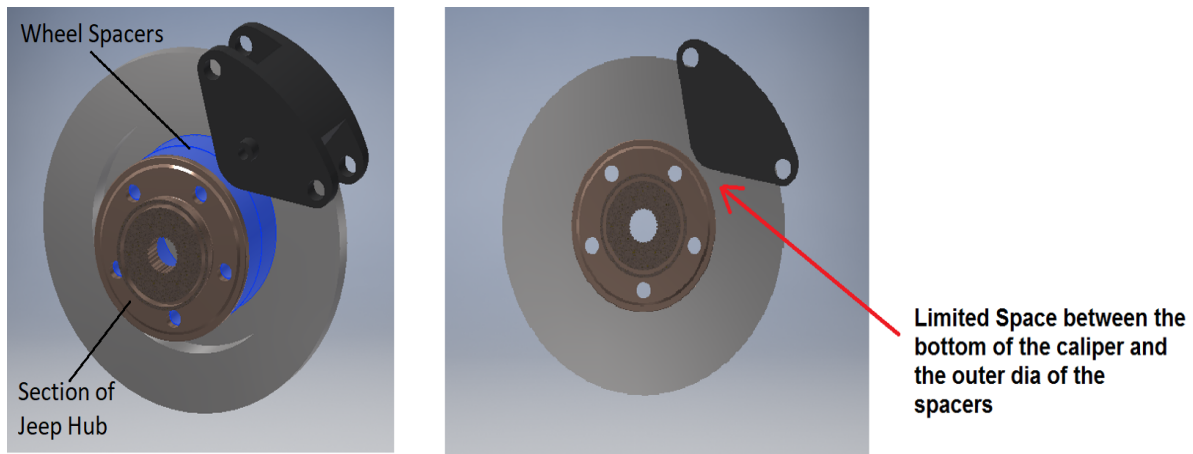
Small clearance between outer surface of wheel spacer and the bottom of brake caliper.
